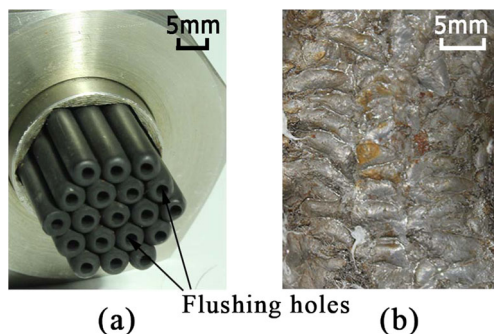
Bundled electrode (a) and machined surface on workpiece (b)
